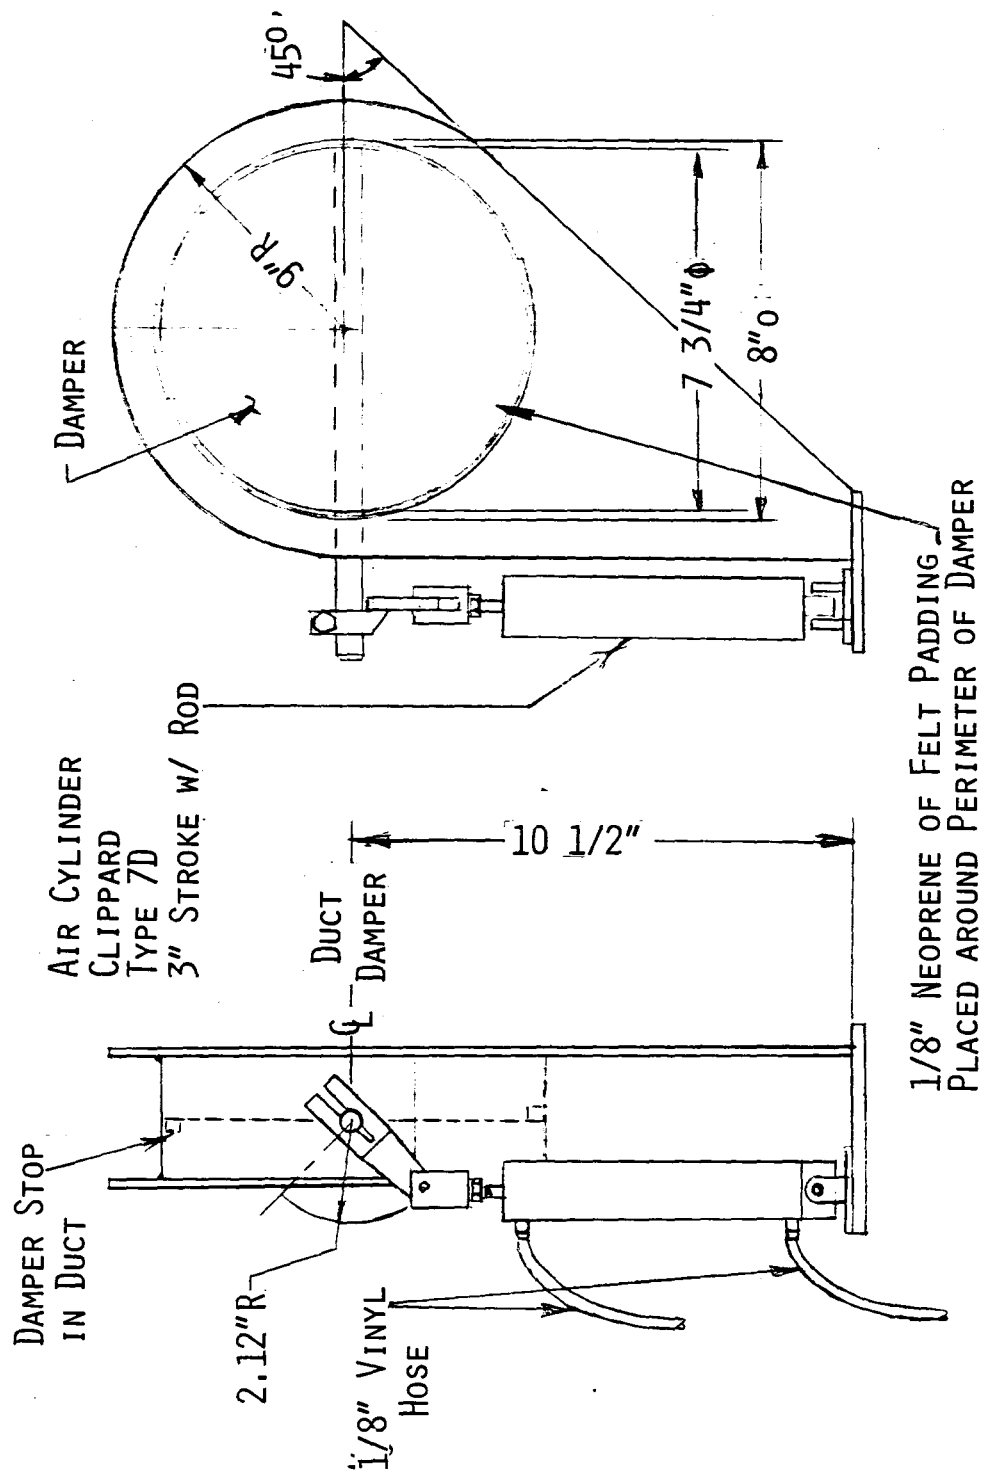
Kaolin slurry mixing tank hood duct damper detail.
